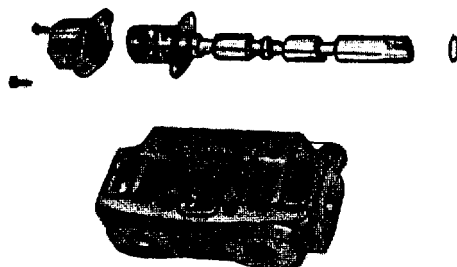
CONTROL VALVE BANK ASSEMBLY - TIE BOLTS
